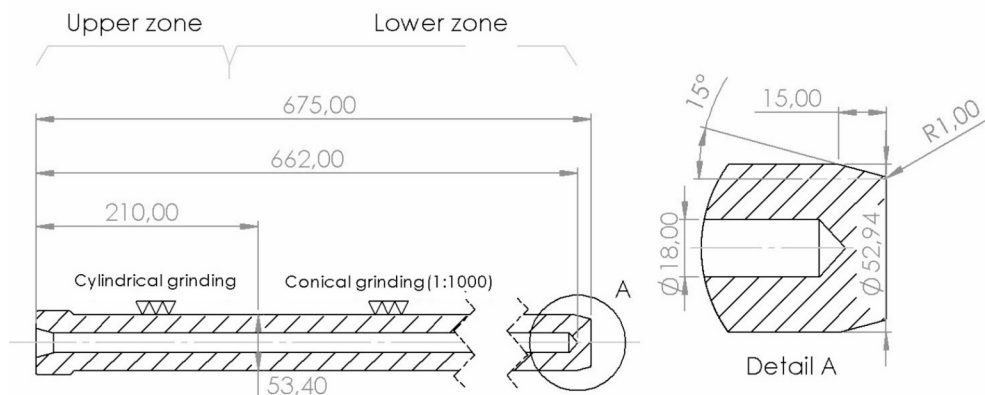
Manufacturing drawing of the hot brass-tube extrusion mandrel (DIN 1.2367).
